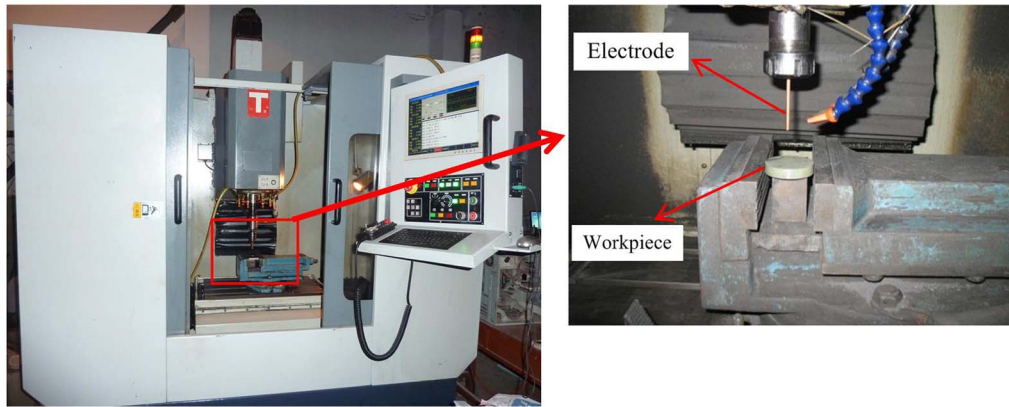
EDM milling machine for machining ZnO/Al₂O₃ ceramic. doi:10.1371/journal.pone.0110775.g001
